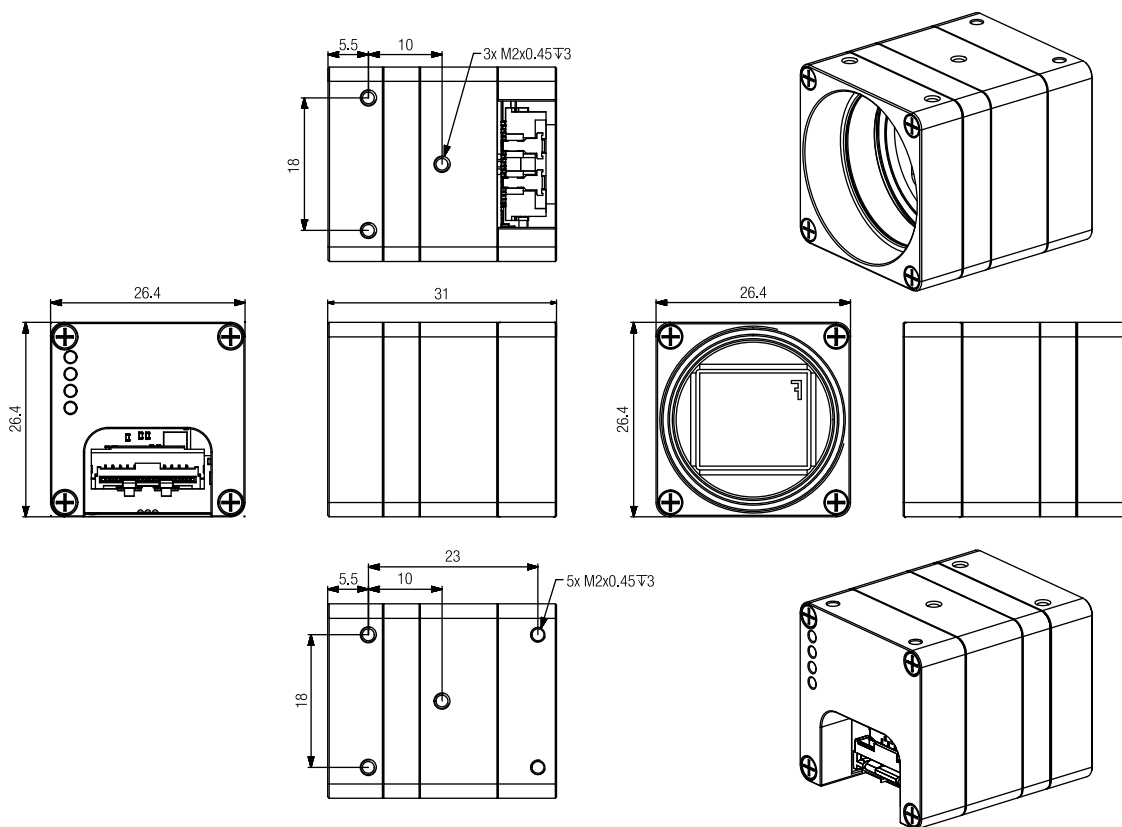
Dimensional drawing of MX081/161/203/245xG-SY-X2G2-FV-HDR (C-mount (with C-mount module B))
